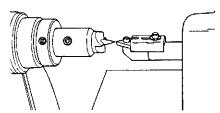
Align the top edge of the cutter with the tip of the lathe drive center.
